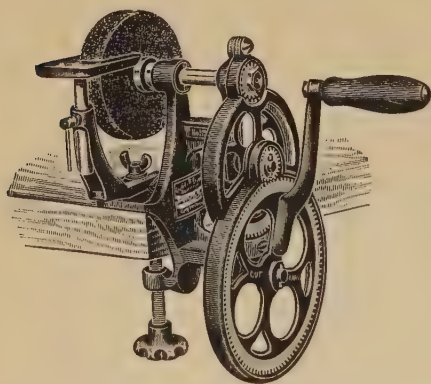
What kinds of simple machines can you find in this machine tool? (Courtesy, Goodell-Pratt Co.)
